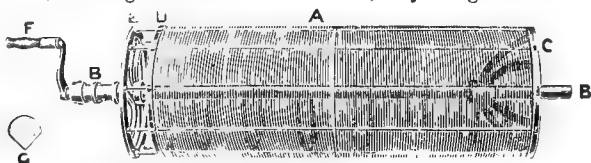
ADJUSTABLE ROTARY SCREEN.
